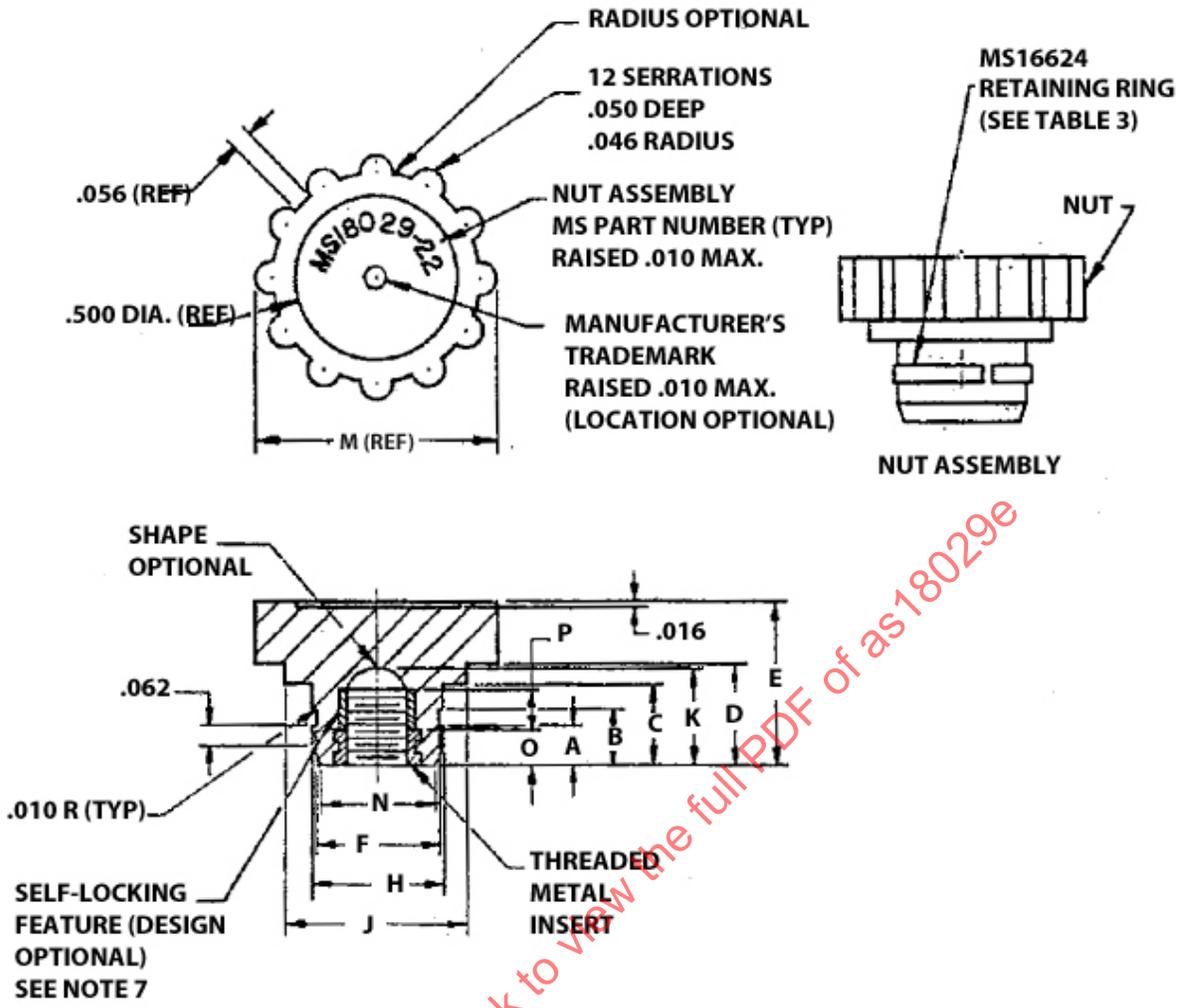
NUT ASSEMBLY CONFIGURATIONS
